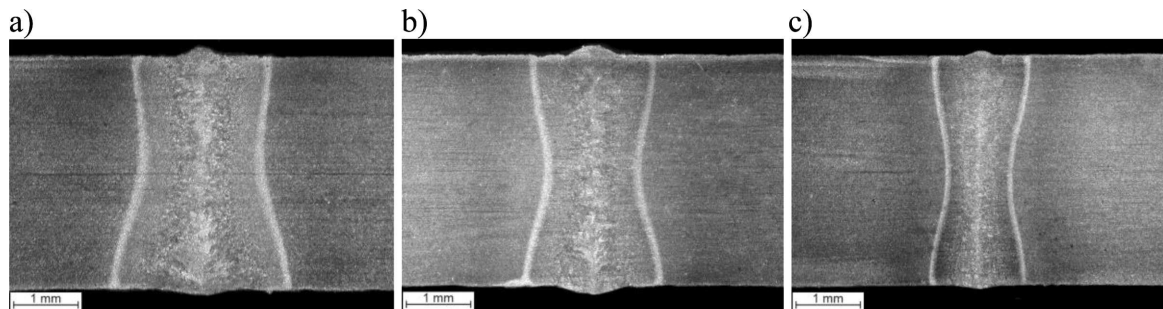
Macrographs of the cross-section of bead-on-plate welds produced at laser power of 3300 W and different welding speeds: a) 2.0 m/min; b) 4.0 m/min; c) 6.0 m/min (Table 2)
